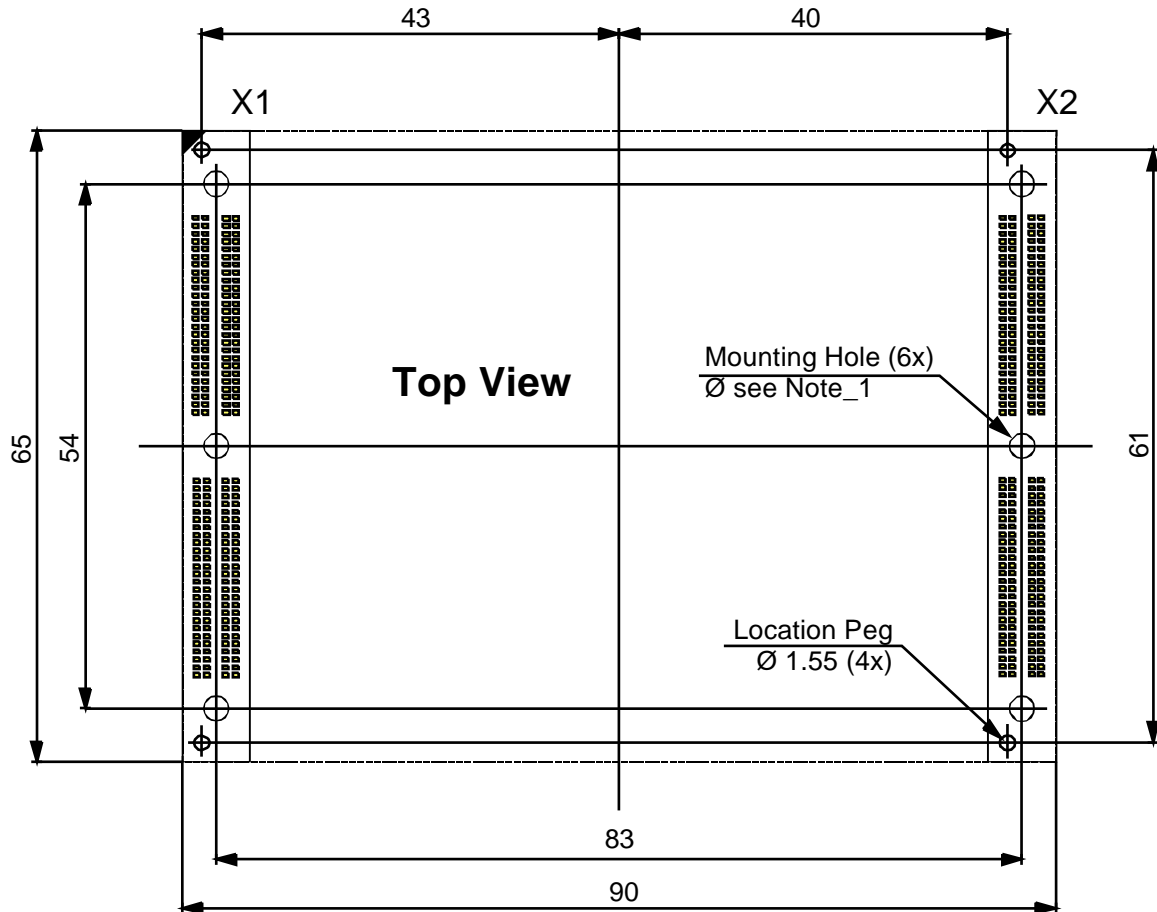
EXM32 Module Footprint Dimensions on Baseboard
